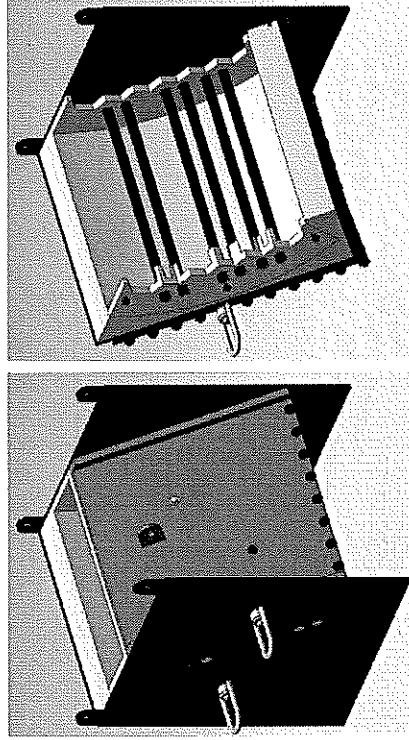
RENDER OF THE PSR MOLD IN THE "6 HEATER" CONFIGURATION: FULL ASSEMBLY (LEFT) AND FRAME WALL, MOLD CAP, AND INSIDE PLATE REMOVED FOR CLARITY (RIGHT).
